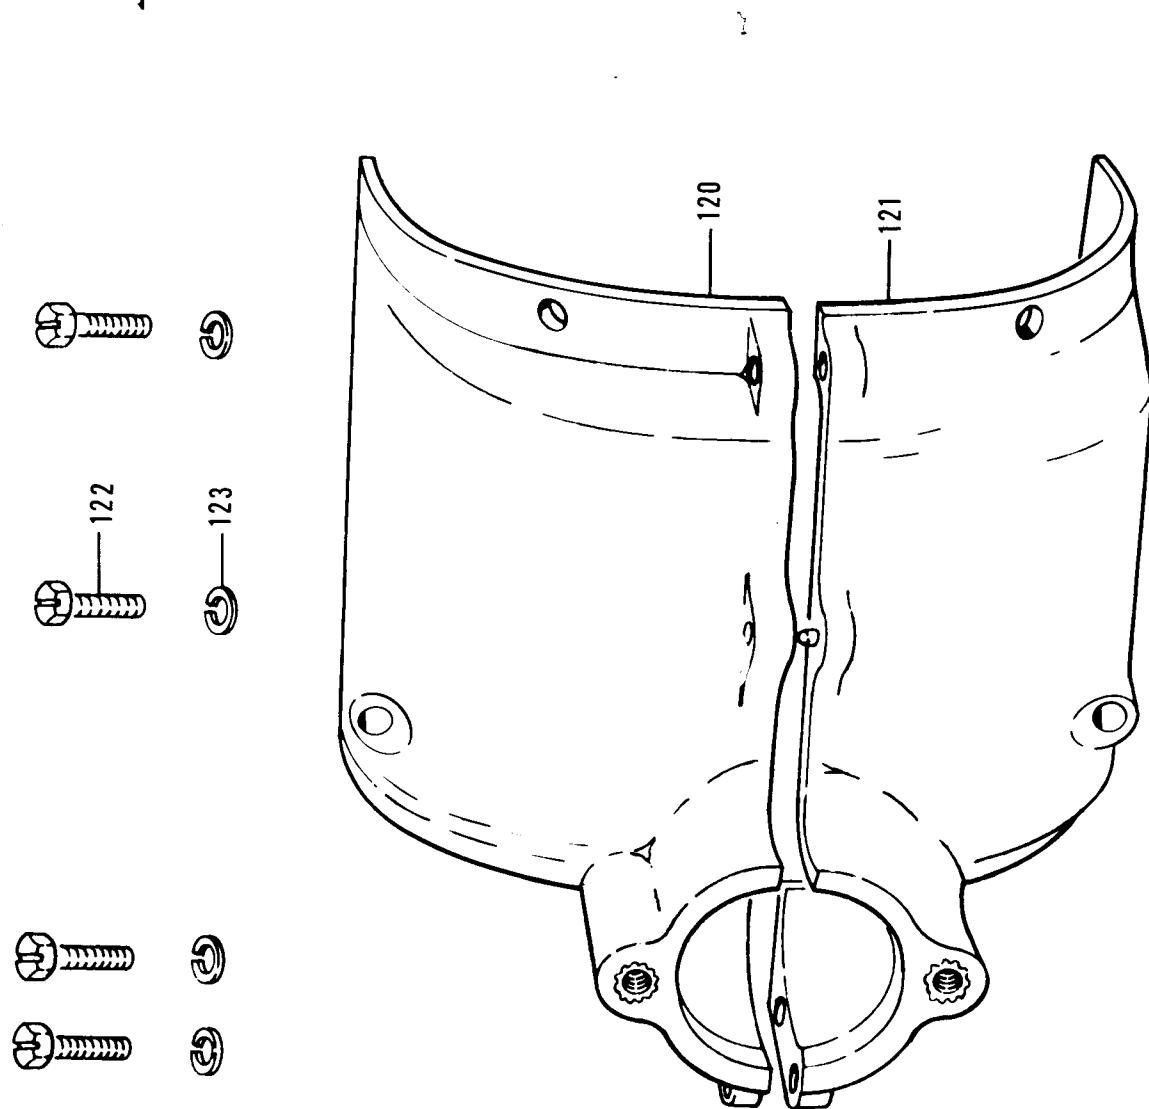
Magneto, Ignition (Radio Shield Assembly) (Sheet 4 of 10)
